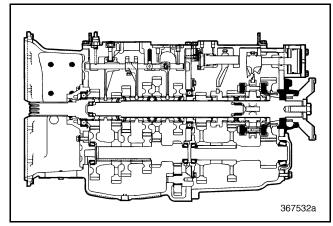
Rear Mainshaft Bearing Cover Component Locator (T313L/T318L Shown)
